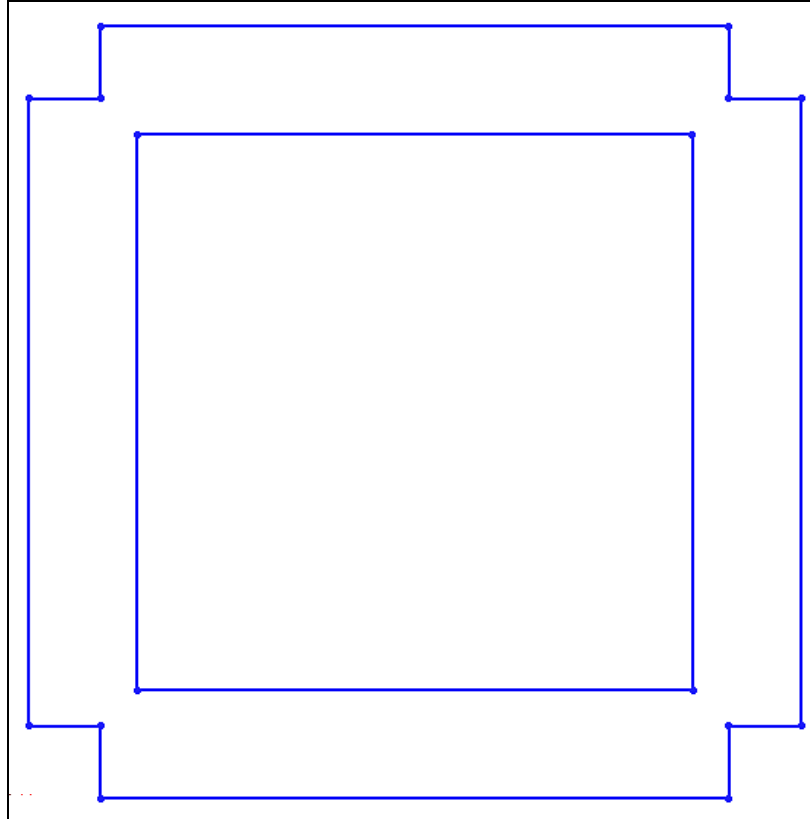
The basic pattern for cutting the fabrics for fabricating a composite part by the setup in figures 3 and 4. The intended part size is that of the inner box.
